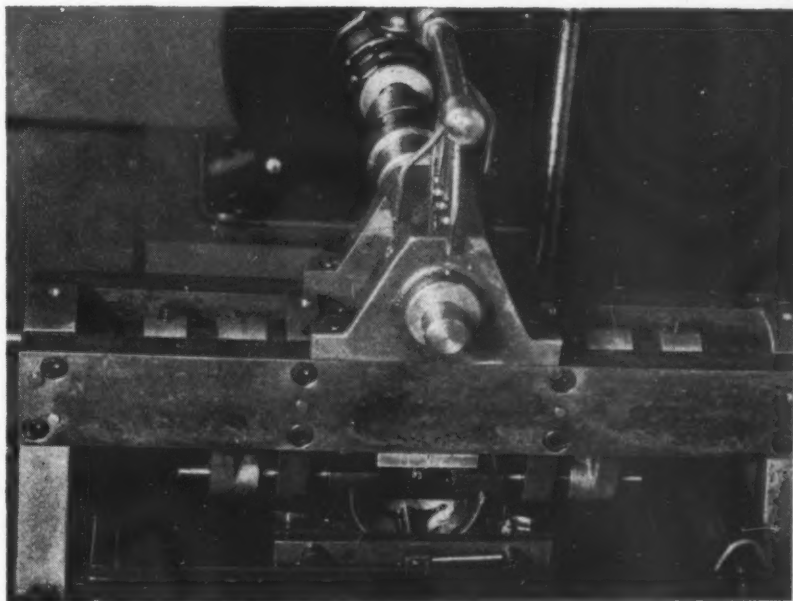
Test for fatigue of a lined bearing half shell. Ends are flexed .003-inch by a reciprocating device
